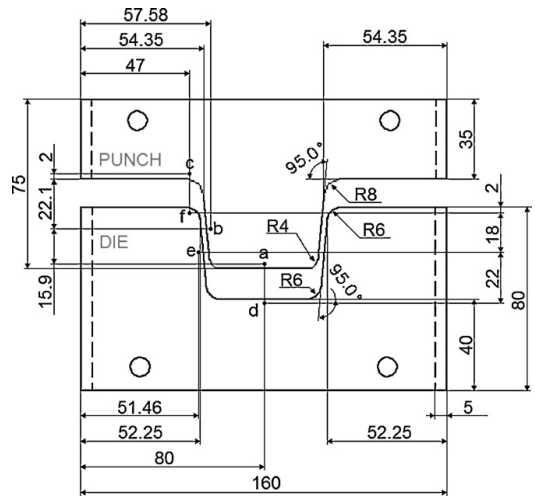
Mechanical drawing of the cold punch and die (mm). Tool thickness is 2 mm.
